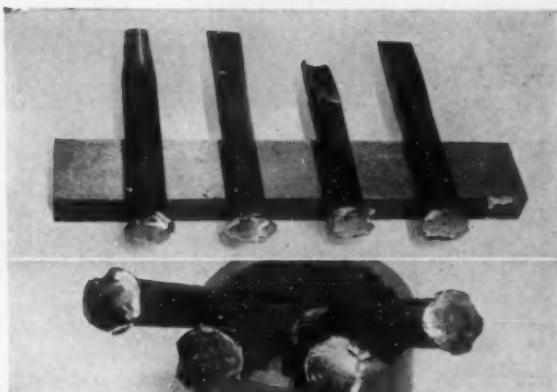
Showing chisels, the striking ends of which are battered, cracked, and mushroomed
